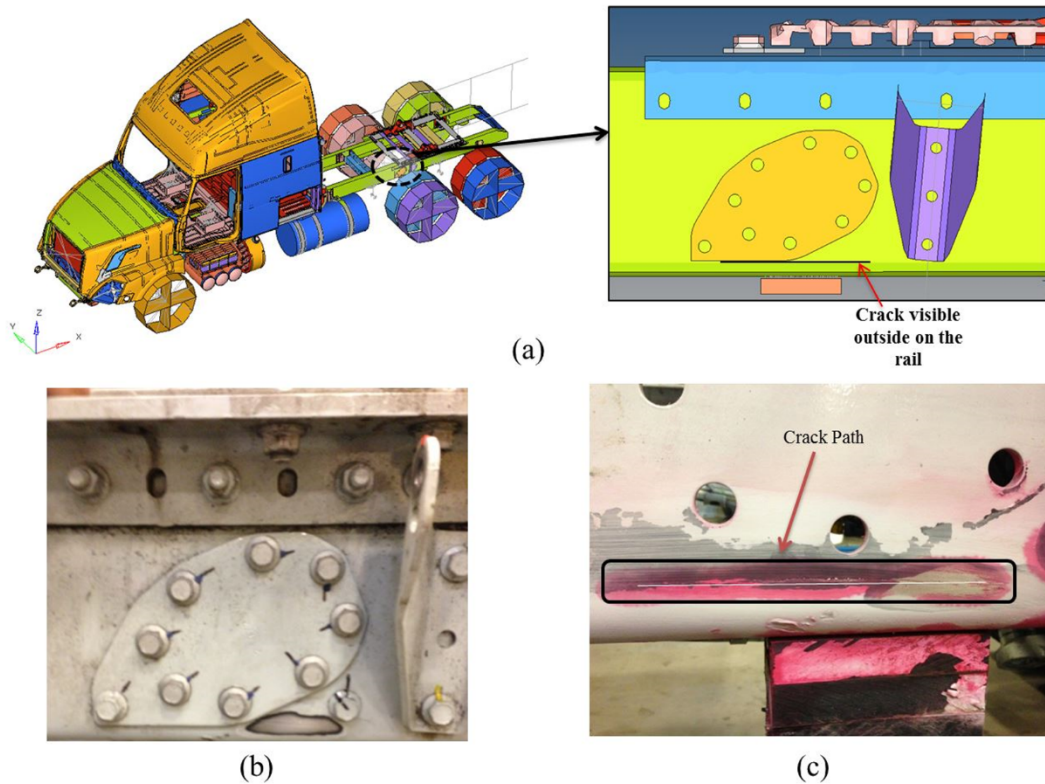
(a) Location of frame crack shown in a full vehicle model (b) Frame outer reinforcement plate and frame crack path along lower edge contact (c) Crack path visible on frame after removing the outer reinforcement plate.
